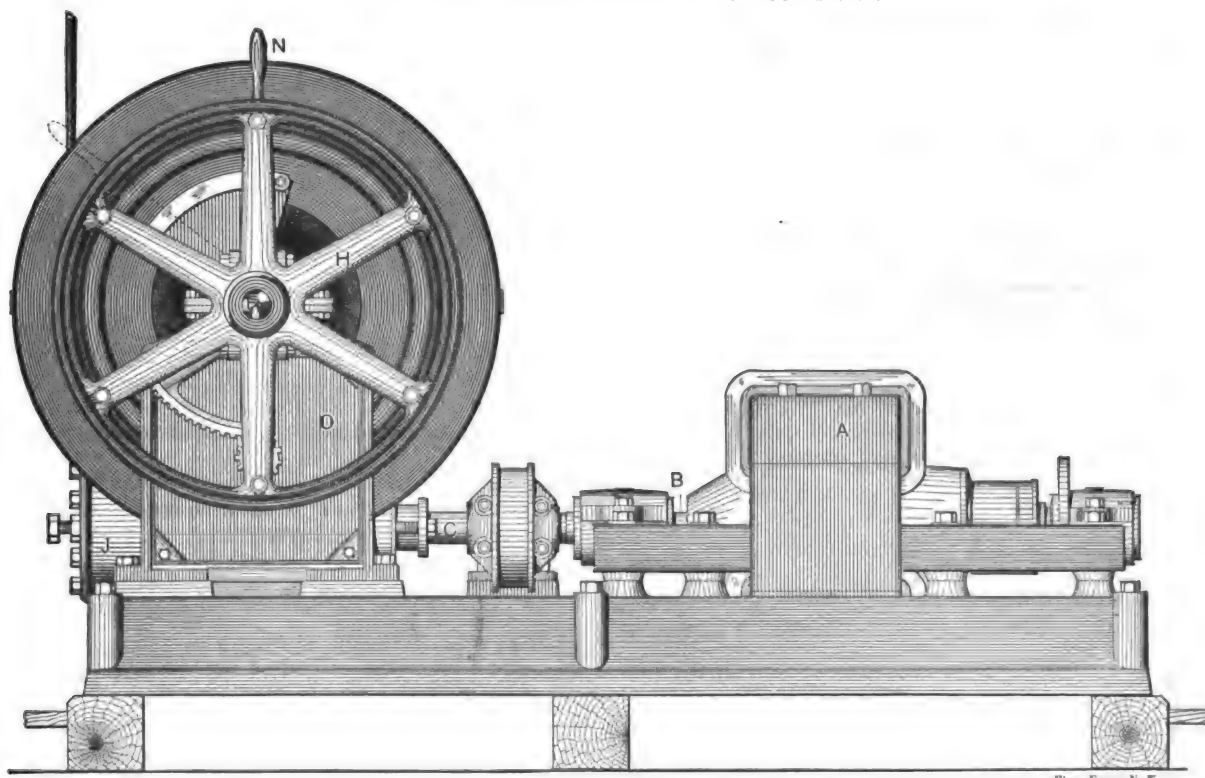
NEW ELECTRIC DOCK HOIST—ELEVATION.
